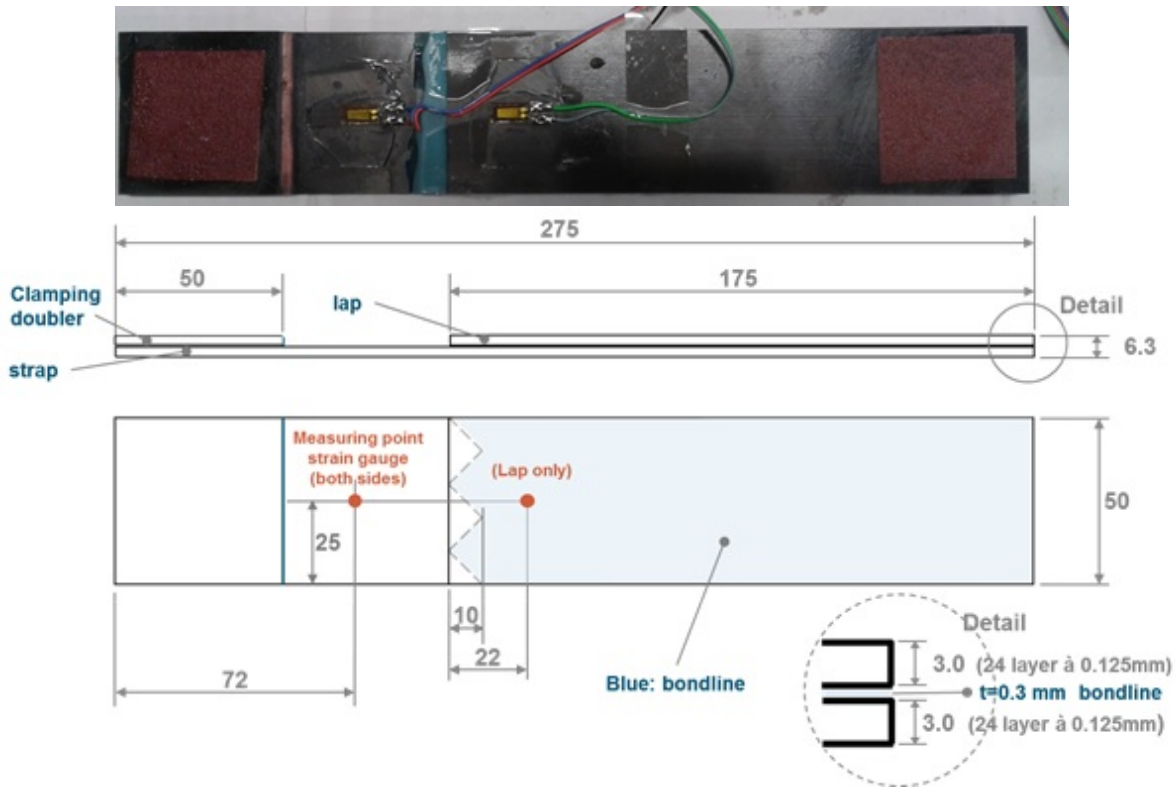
CLS-specimen of tests (top) / geometrical dimensions of the CLS-specimen (bottom)
